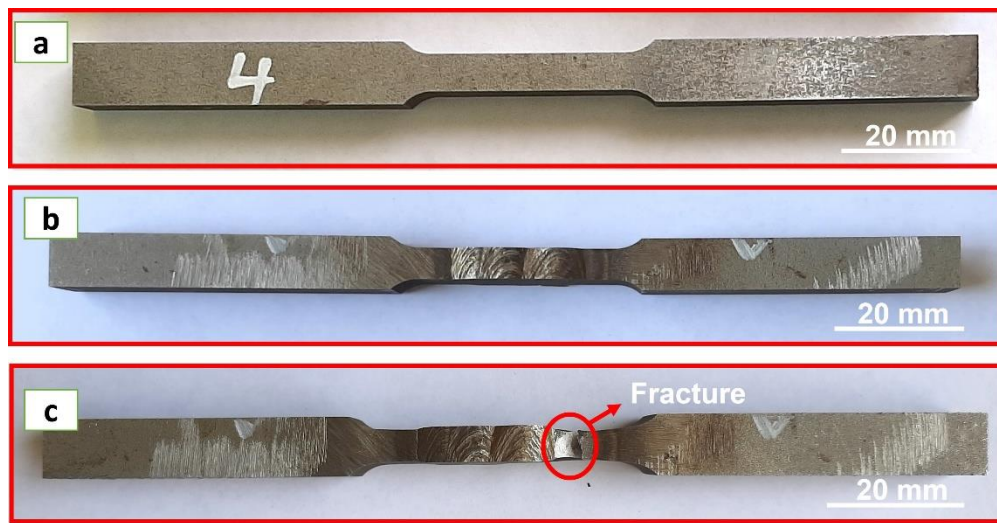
(a) tensile test sample of the 2507SDSS BM, (b) specimen of the SMAWed joint before tensile test (c) specimen of the welded joint after tensile test.
